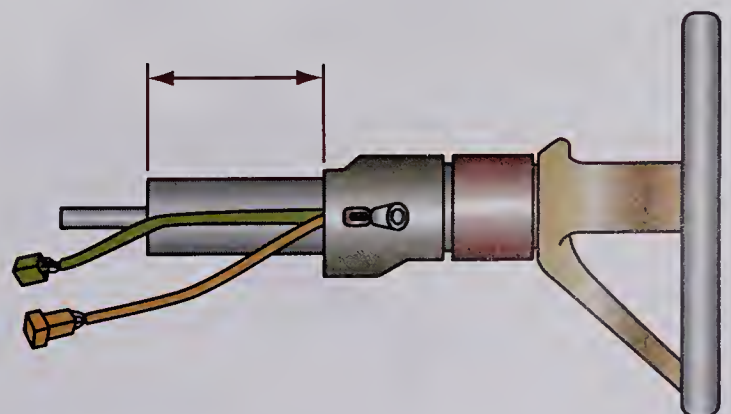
Measuring distance from the end of the bearing assembly to the upper steering column jacket.
